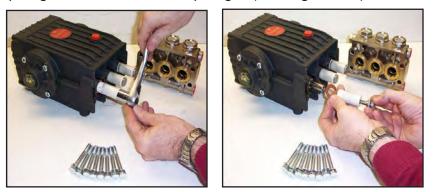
Remove Stainless Steel Plunger Bolt and Ceramic Plunger
